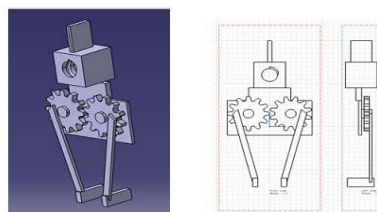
(a) 3-D view of the gripper. (b) Front and side view of the gripper.
